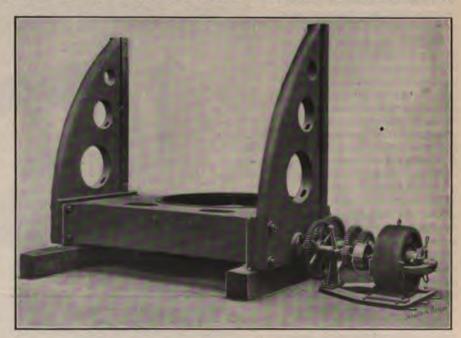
Ten-foot Boring Mill, partly completed, Driven by Variable Speed Motor.
